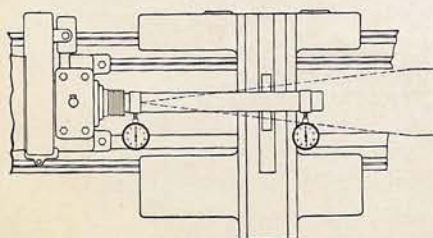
Testing Alignment of Headstock Spindle in the Horizontal Plane with Dial Indicator
